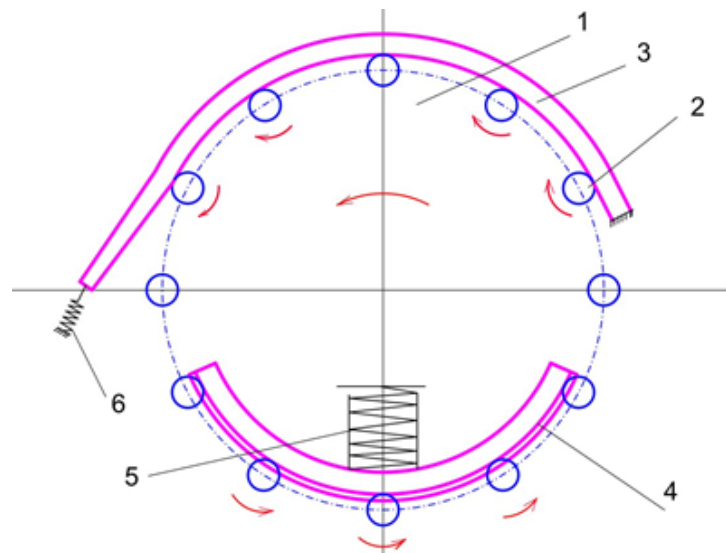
Series vertical spindle drum scheme: 1 is the drum; 2 is the spindle; 3 is drive belt; 4 is a reversible pad; 5 and 6 are springs.
